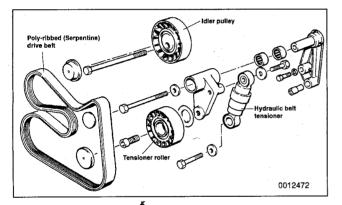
Drive belt and tensioner assembly for late 4-cylinder engine with poly-ribbed drive belt.
